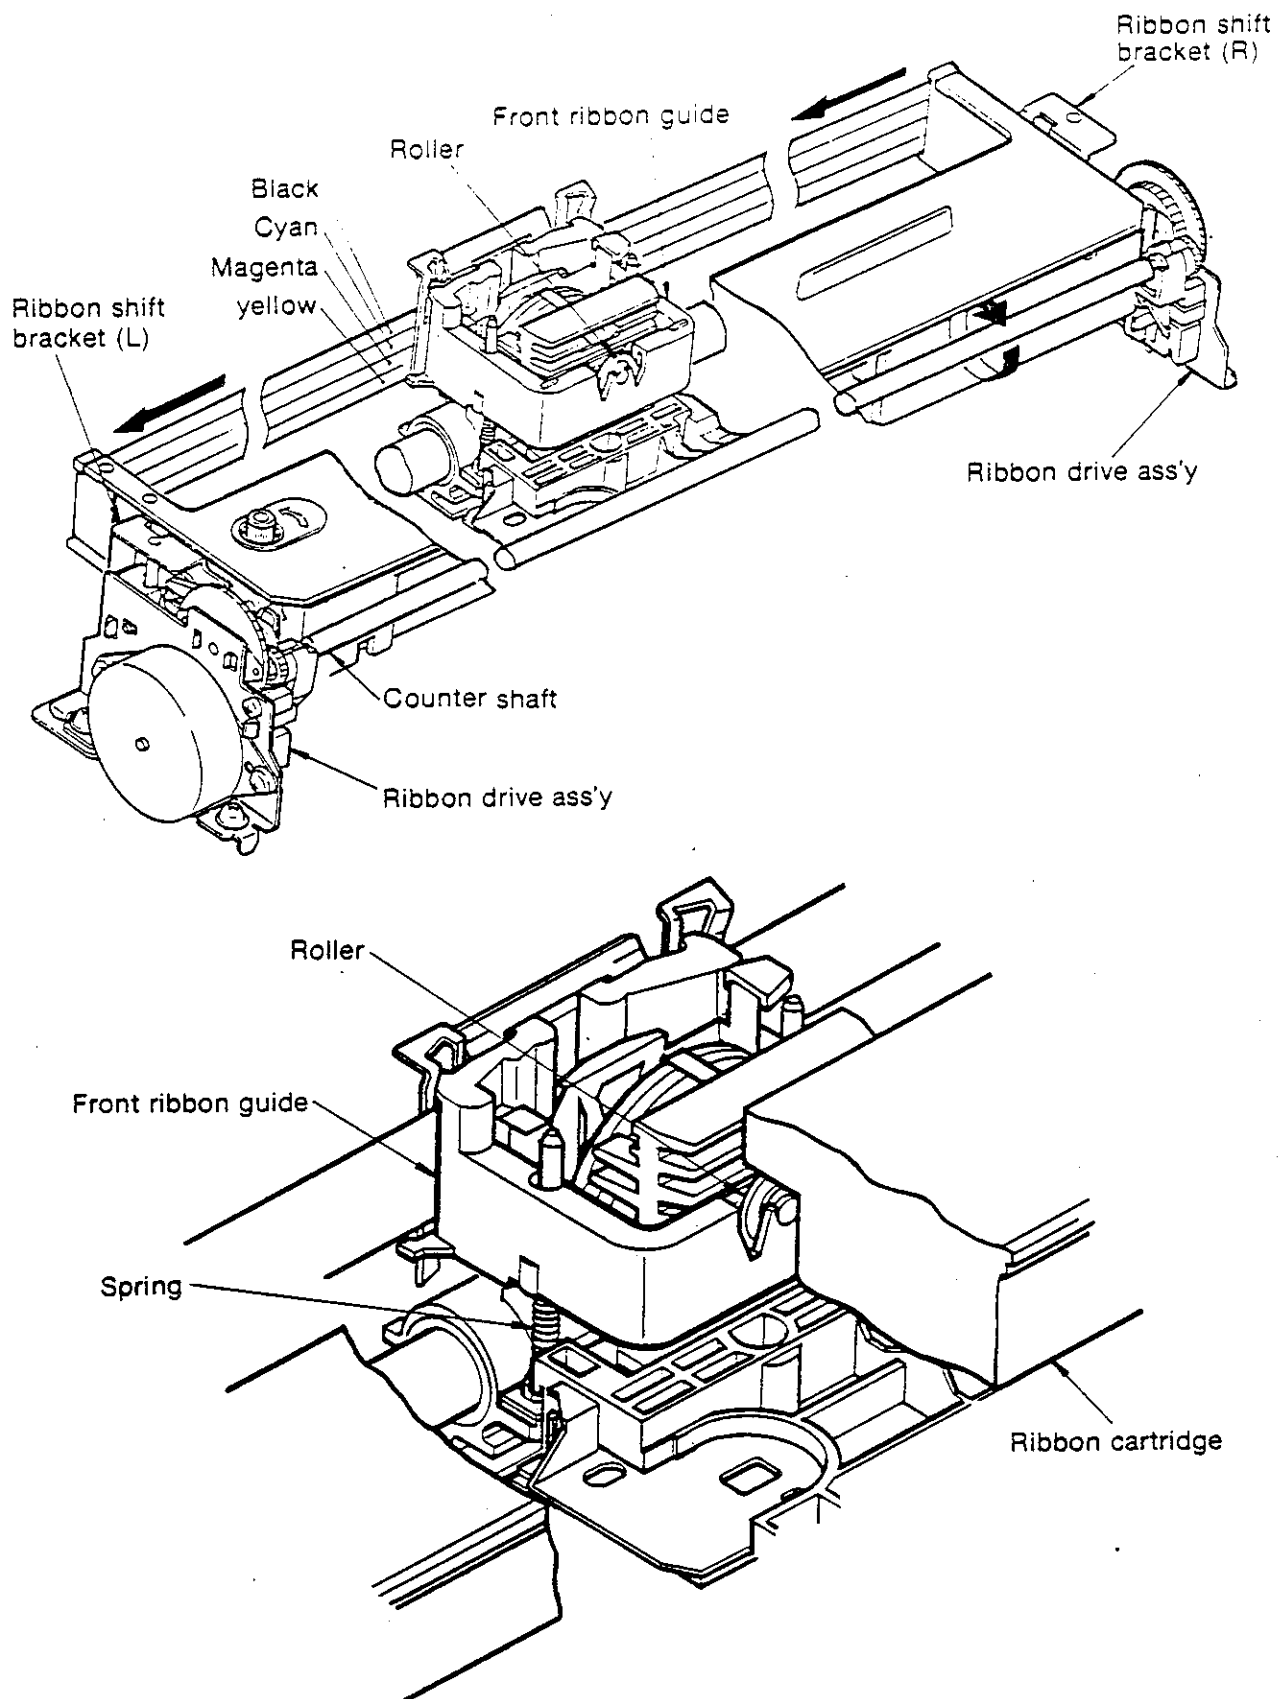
Ribbon drive assembly and peripheral mechanisms
